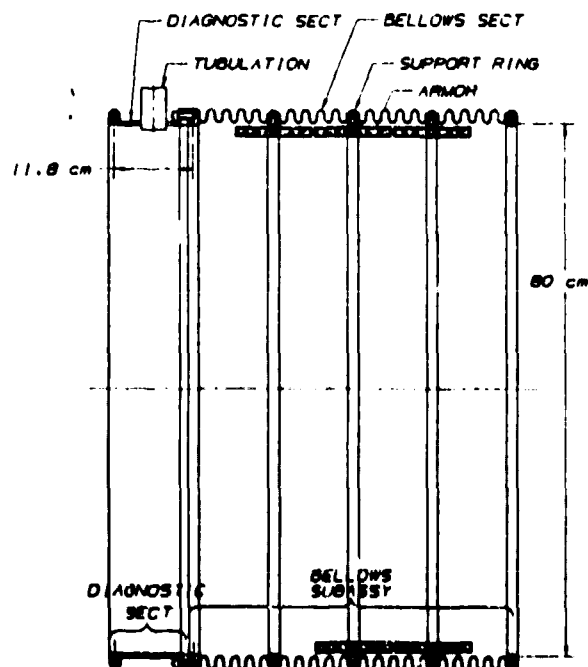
ZTH liner subassembly non arced, only 4 of 7 bellows sections shown
